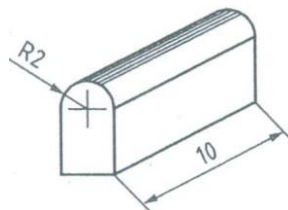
Hemi-cylindrical plate for measurement of thickness(Dimensions in millimeters)
